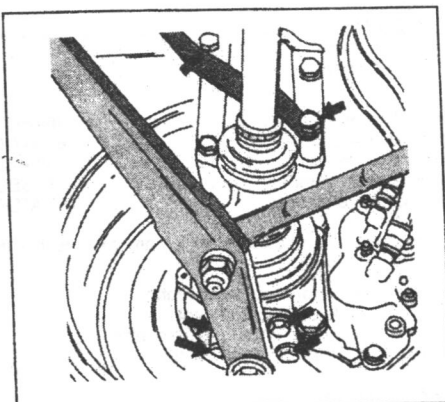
Suspension ball joint and steering lever must be disconnected from the steering knuckle.
